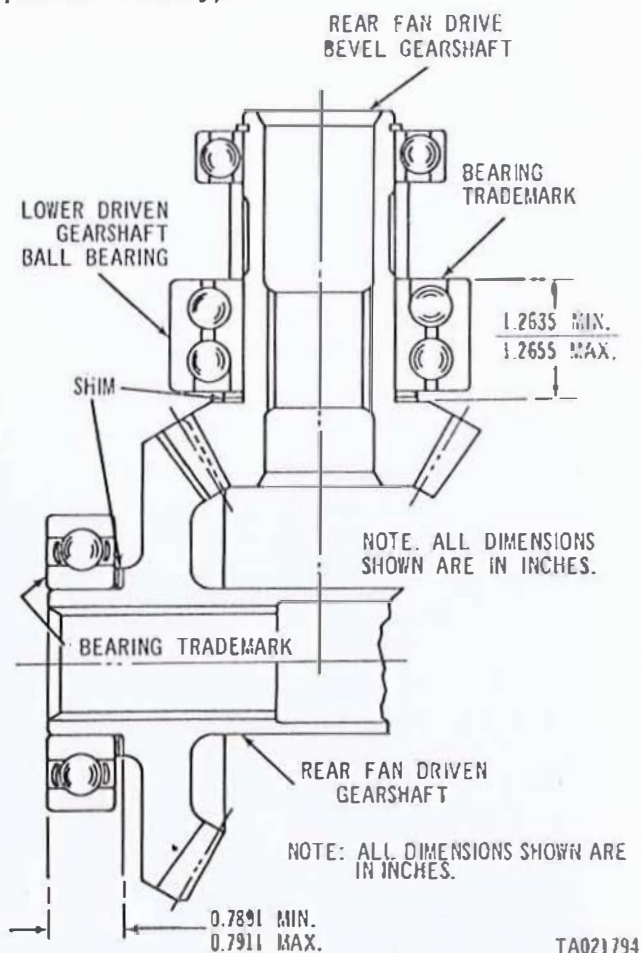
Determining shim thickness for rear fan driven bevel gearshaft and rear fan drive gearshaft.
